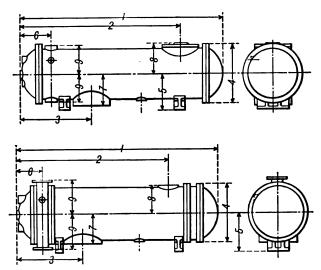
DIMENSIONS OF CLOSED HEATERS. (See Table 5.)
